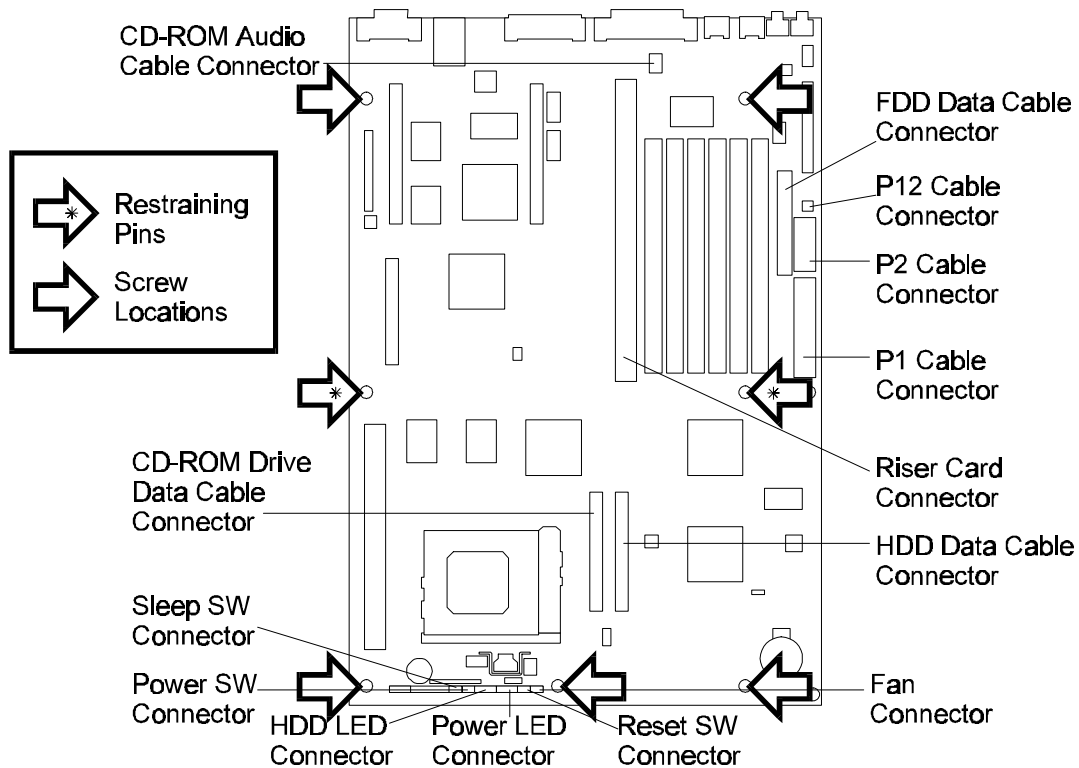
Removing and Replacing the 5160D/5200D System Board
